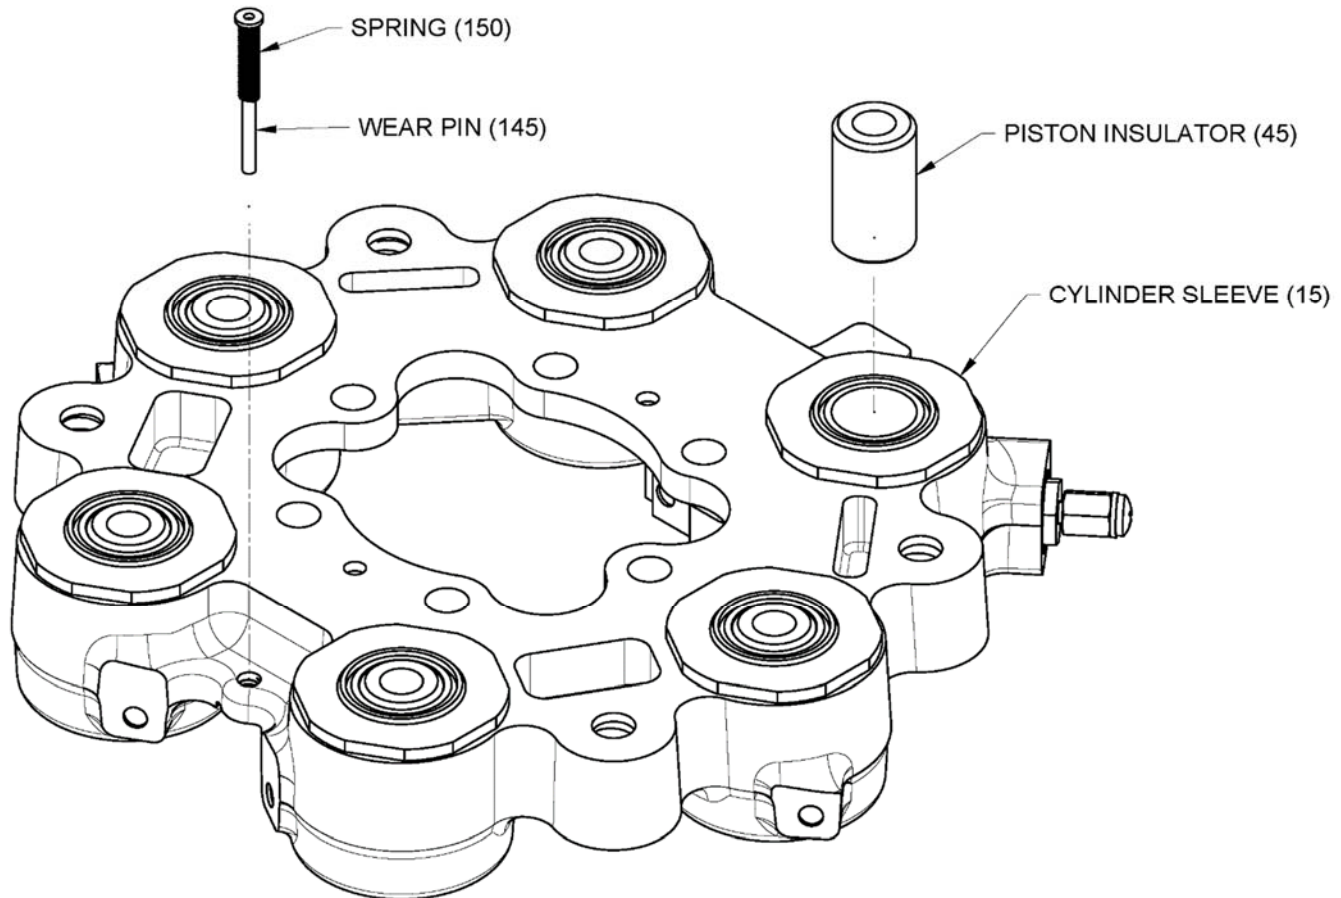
Install the piston insulators (45), wear pin (145), and spring (150)
